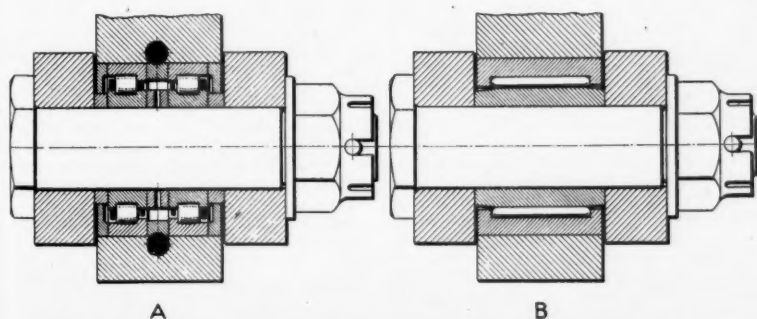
Typical roller bearings for valve gear joints, Ransome & Marles
